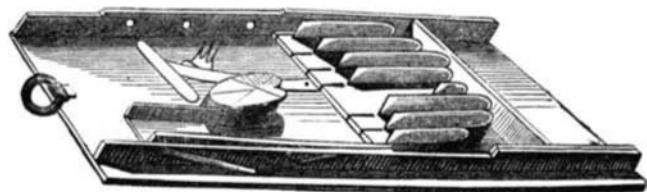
FORM FOR CUTTING GLOVE BLANKS.
